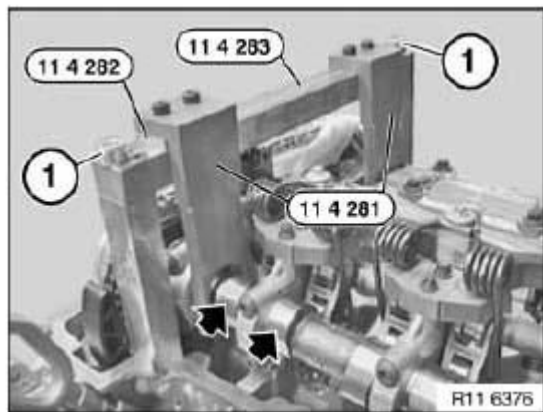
Identifying Special Tool (11 4 281), (11 4 282), (11 4 283) And Screws
